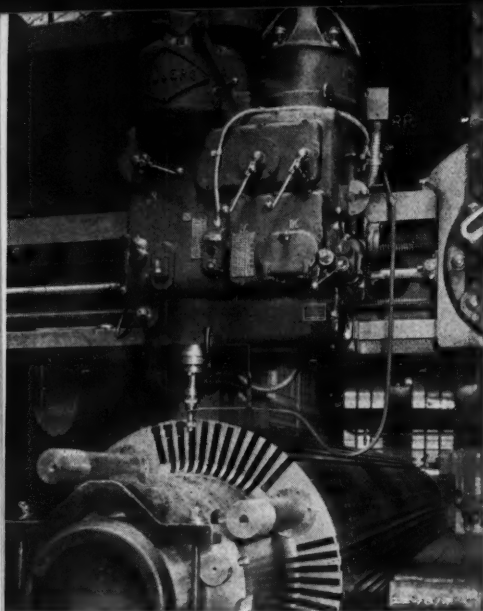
Milling the Wedge Slots in the Assembled Rotor
